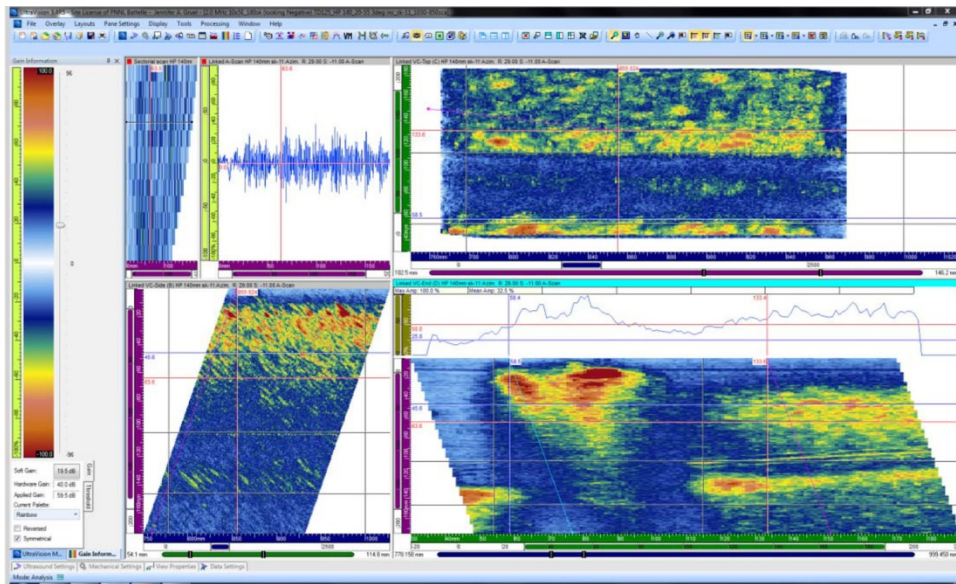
CCW, Skew 0, Axial Flaw 3 Region. Flaw not detected; end-of-specimen is visible and circled in red.
